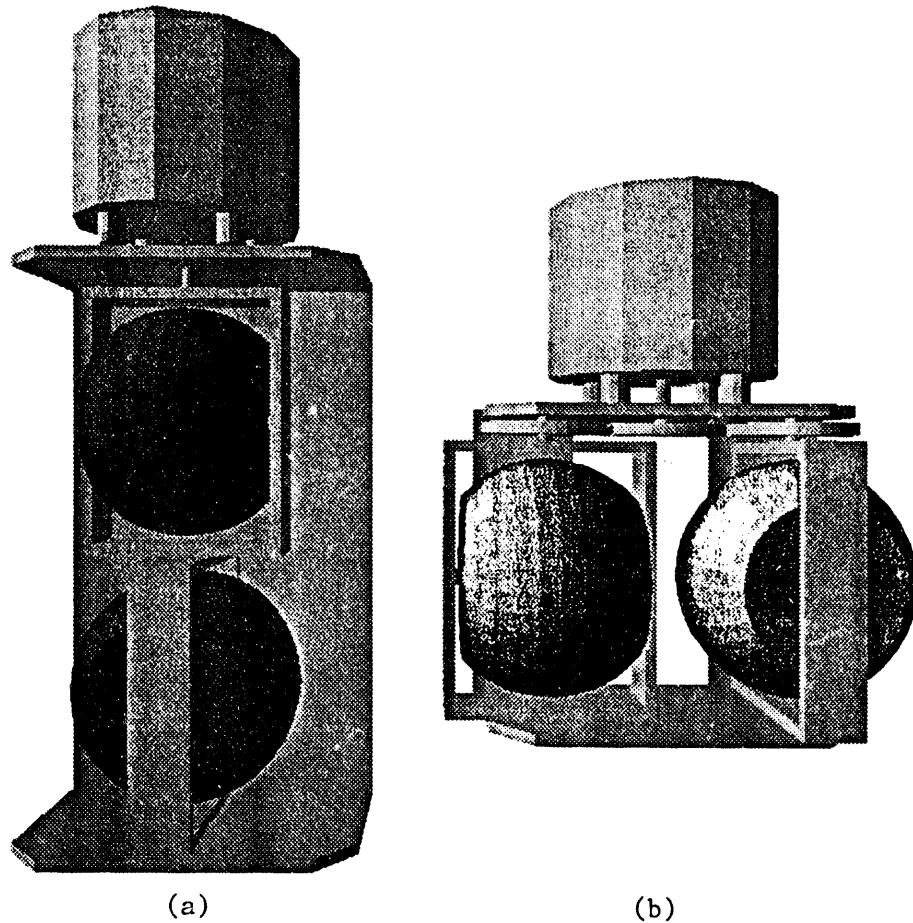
Three-Dimensional Perspectives of a) the "Longitudinal" and b) Orthogonal-Wheel Assembly
